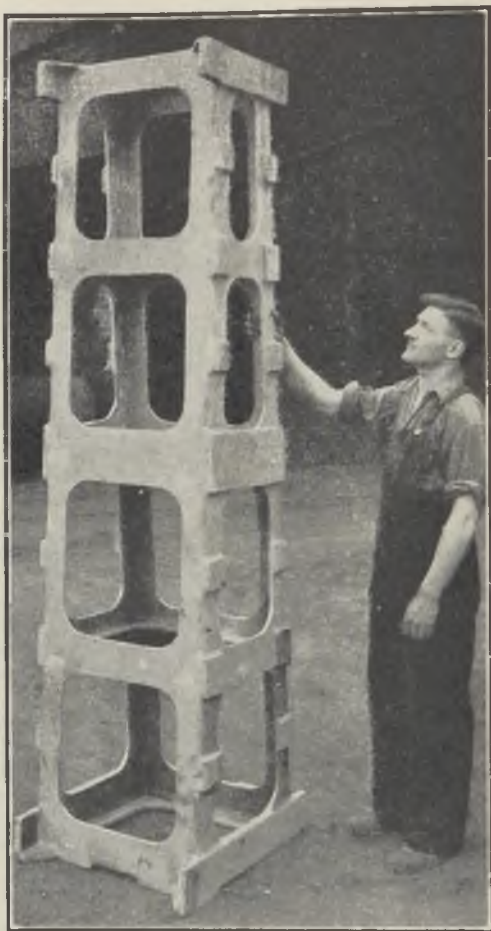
FRAME-SHAPED ALUMINIUM-SILICON ALLOY CASTING.
